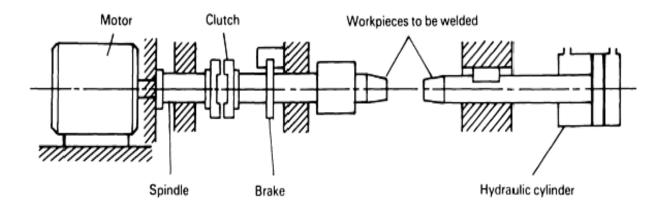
Schematic showing relation of workpiece to key components of a Direct-Drive FRW System
